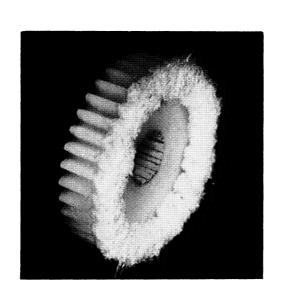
Gears and spline with steel and molded "Zytel" 101 laminated construction ("Min-A-Lash" Construction, Dexter Machine Products, Incorporated).
